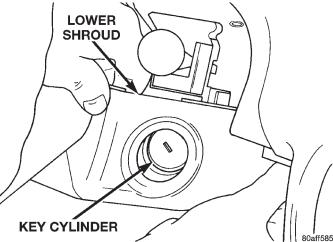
Remove Lower Shroud From Ignition Cylinder
